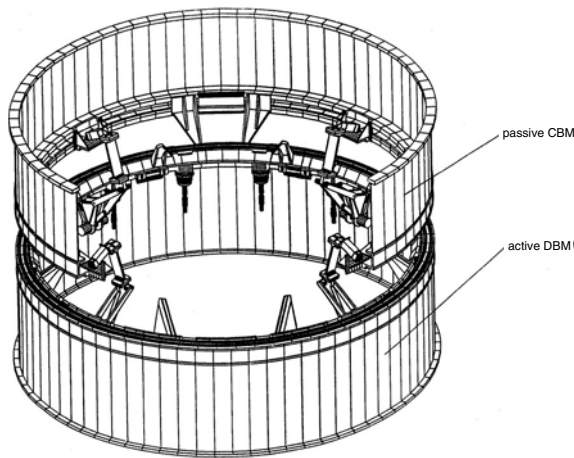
Example: Hermes–Columbus docking mechanism with inside petals (courtesy ESA).
